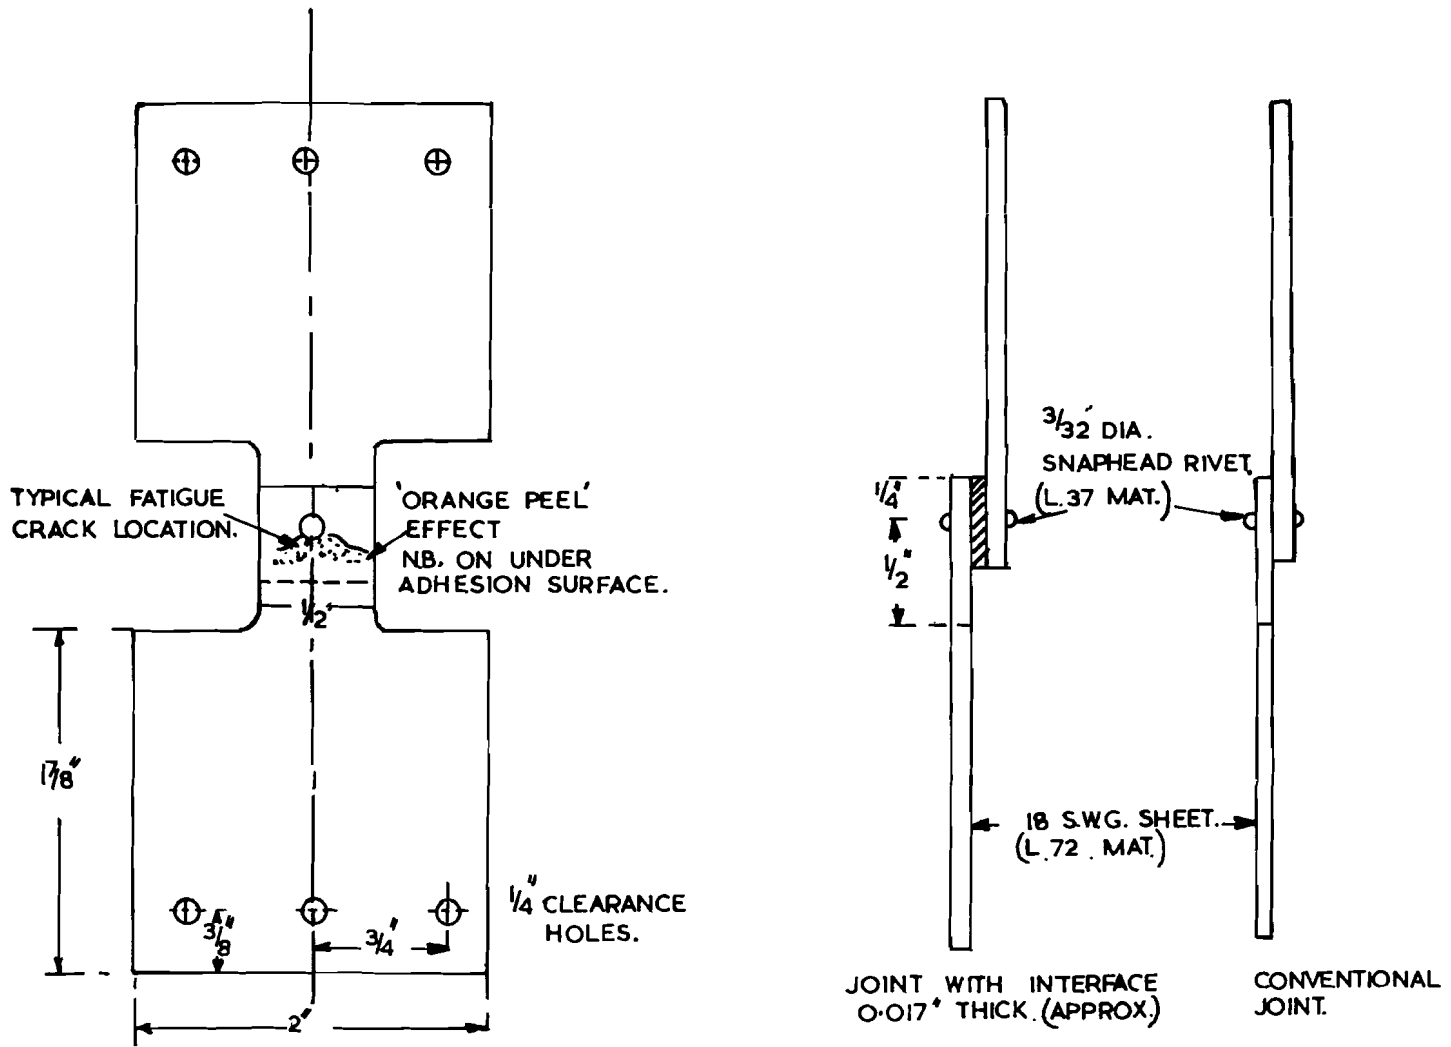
DETAILS OF THE FATIGUE TEST SPECIMENS.
